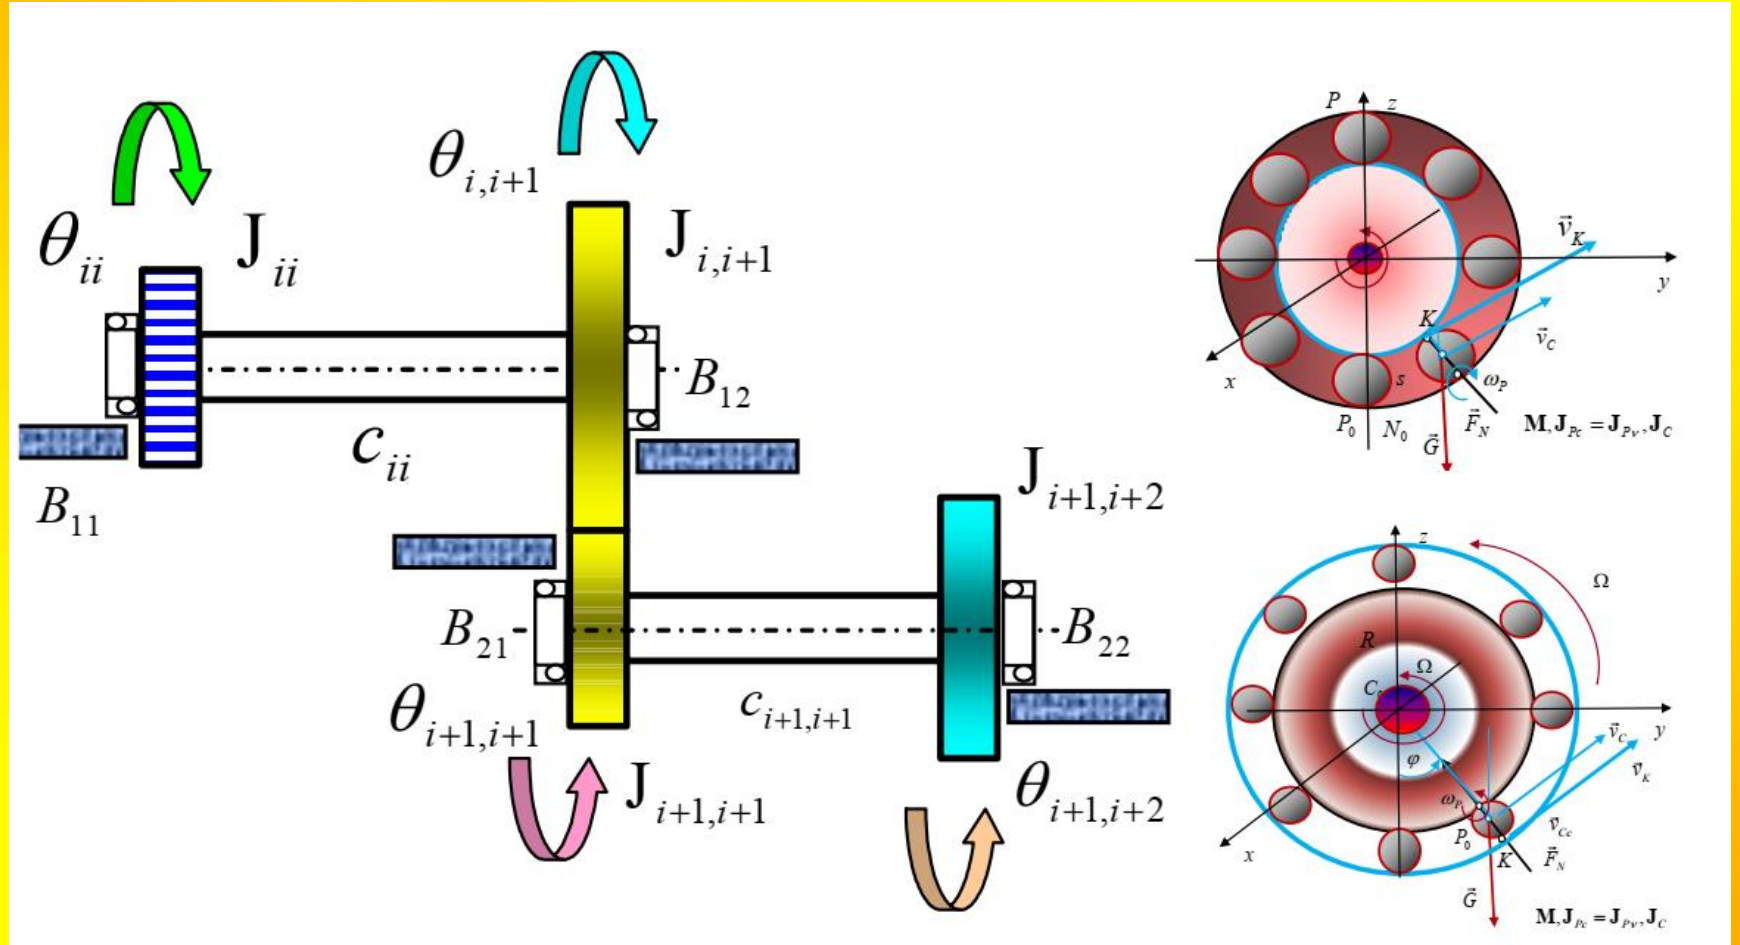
Configuration of radial ball bearings on the shafts of a two-stage gear transmission with unbalanced gears (with debalances in the form of eccentrically placed material points)
